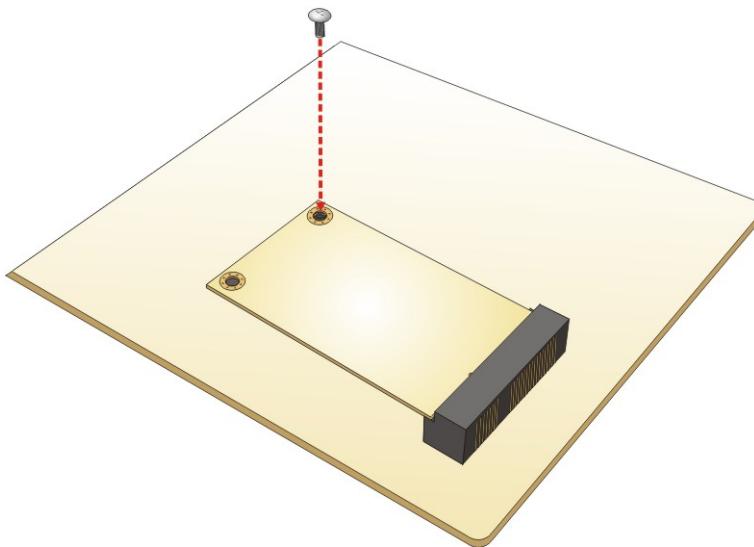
Remove the Retention Screw for the PCIe Mini Card
